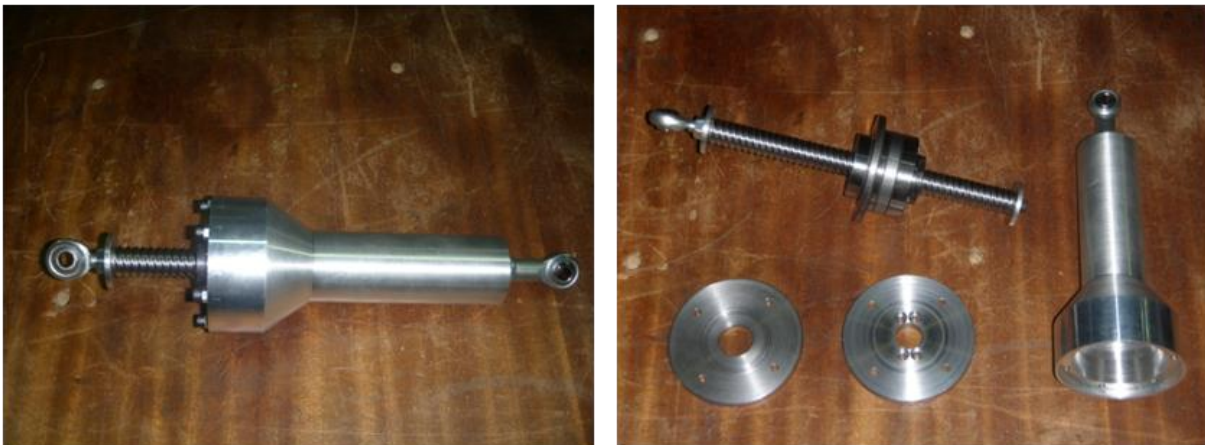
Photograph of a prototype inerter: a) Inerter assembly and b) Principal components
